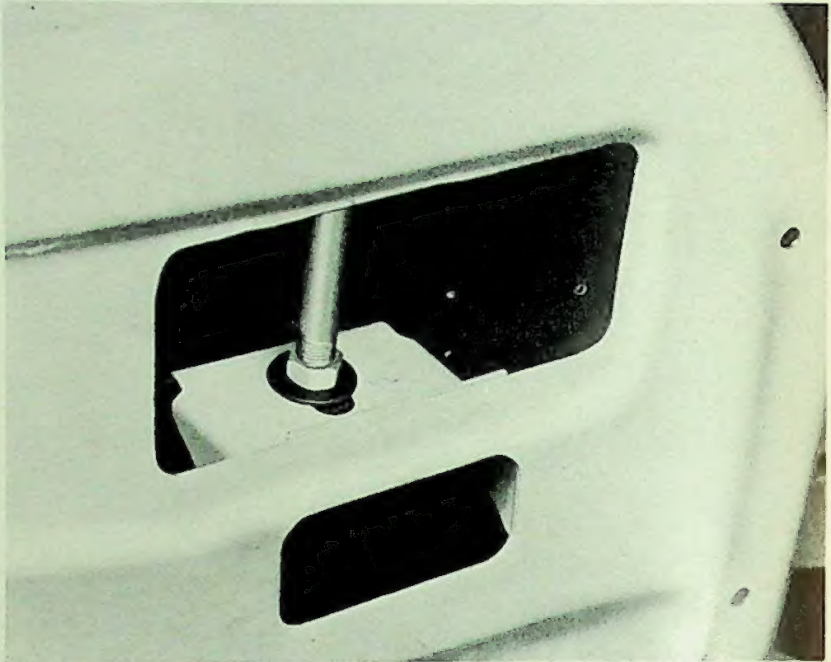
Window Wing Front Support Shaft Locking Nuts Are Accessible Through Openings Shown.
